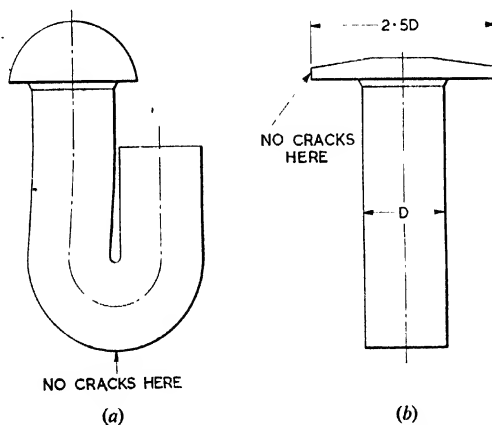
TWO TYPICAL TESTS FOR BOILER RIVETS
